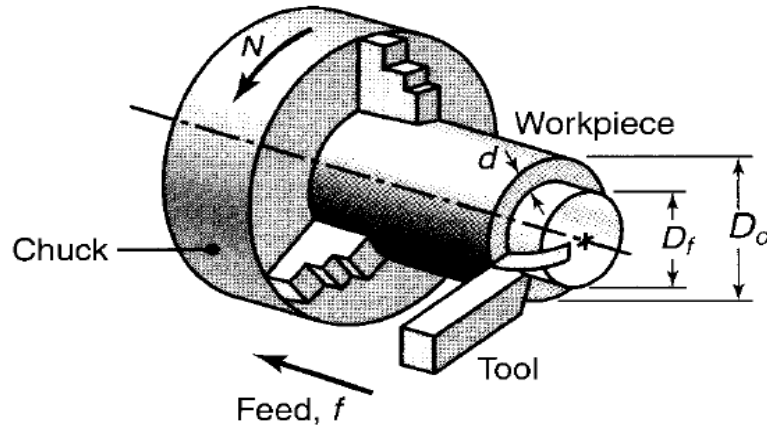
Schematic illustration of the basic turning operation, showing depth of cut, d ; feed, f ; and spindle rotational speed, N , in rev/min.
